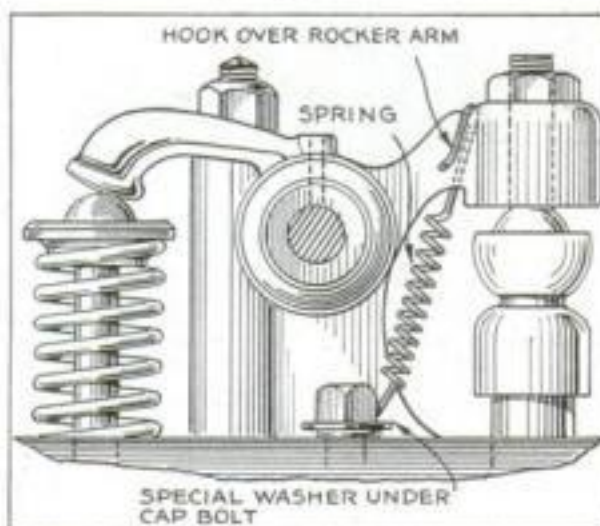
An auxiliary spring fastened to each rocker arm on overhead valves will stop rattle.
